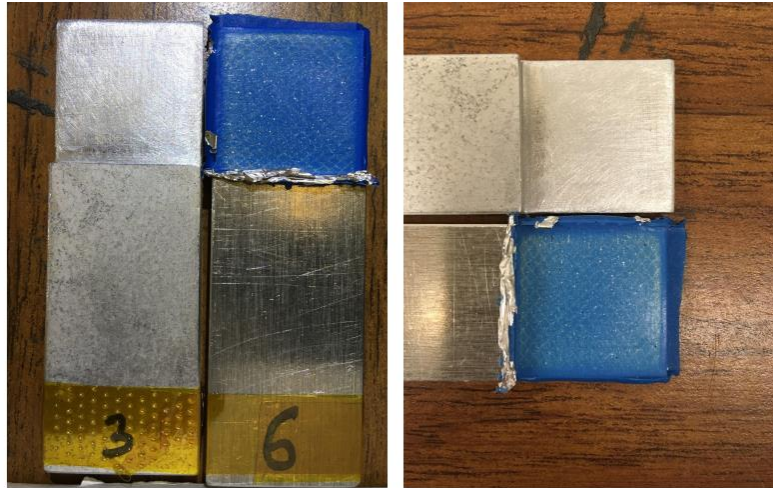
S3-3-6-R50-Fracture Surface
